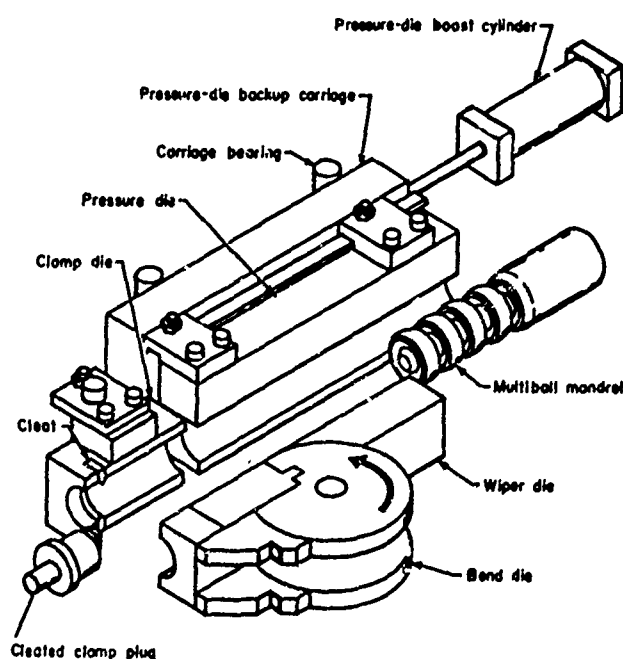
TYPICAL TUBE-BENDING TOOLS<sup>(1)</sup>
